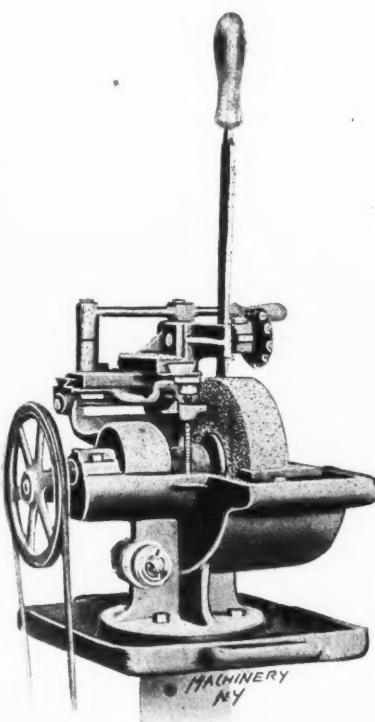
Revolving Oilstone sharpening a Machine Scraper.
